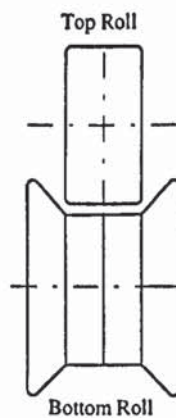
Top and Bottom Rolls for producing a trapezoidal section
